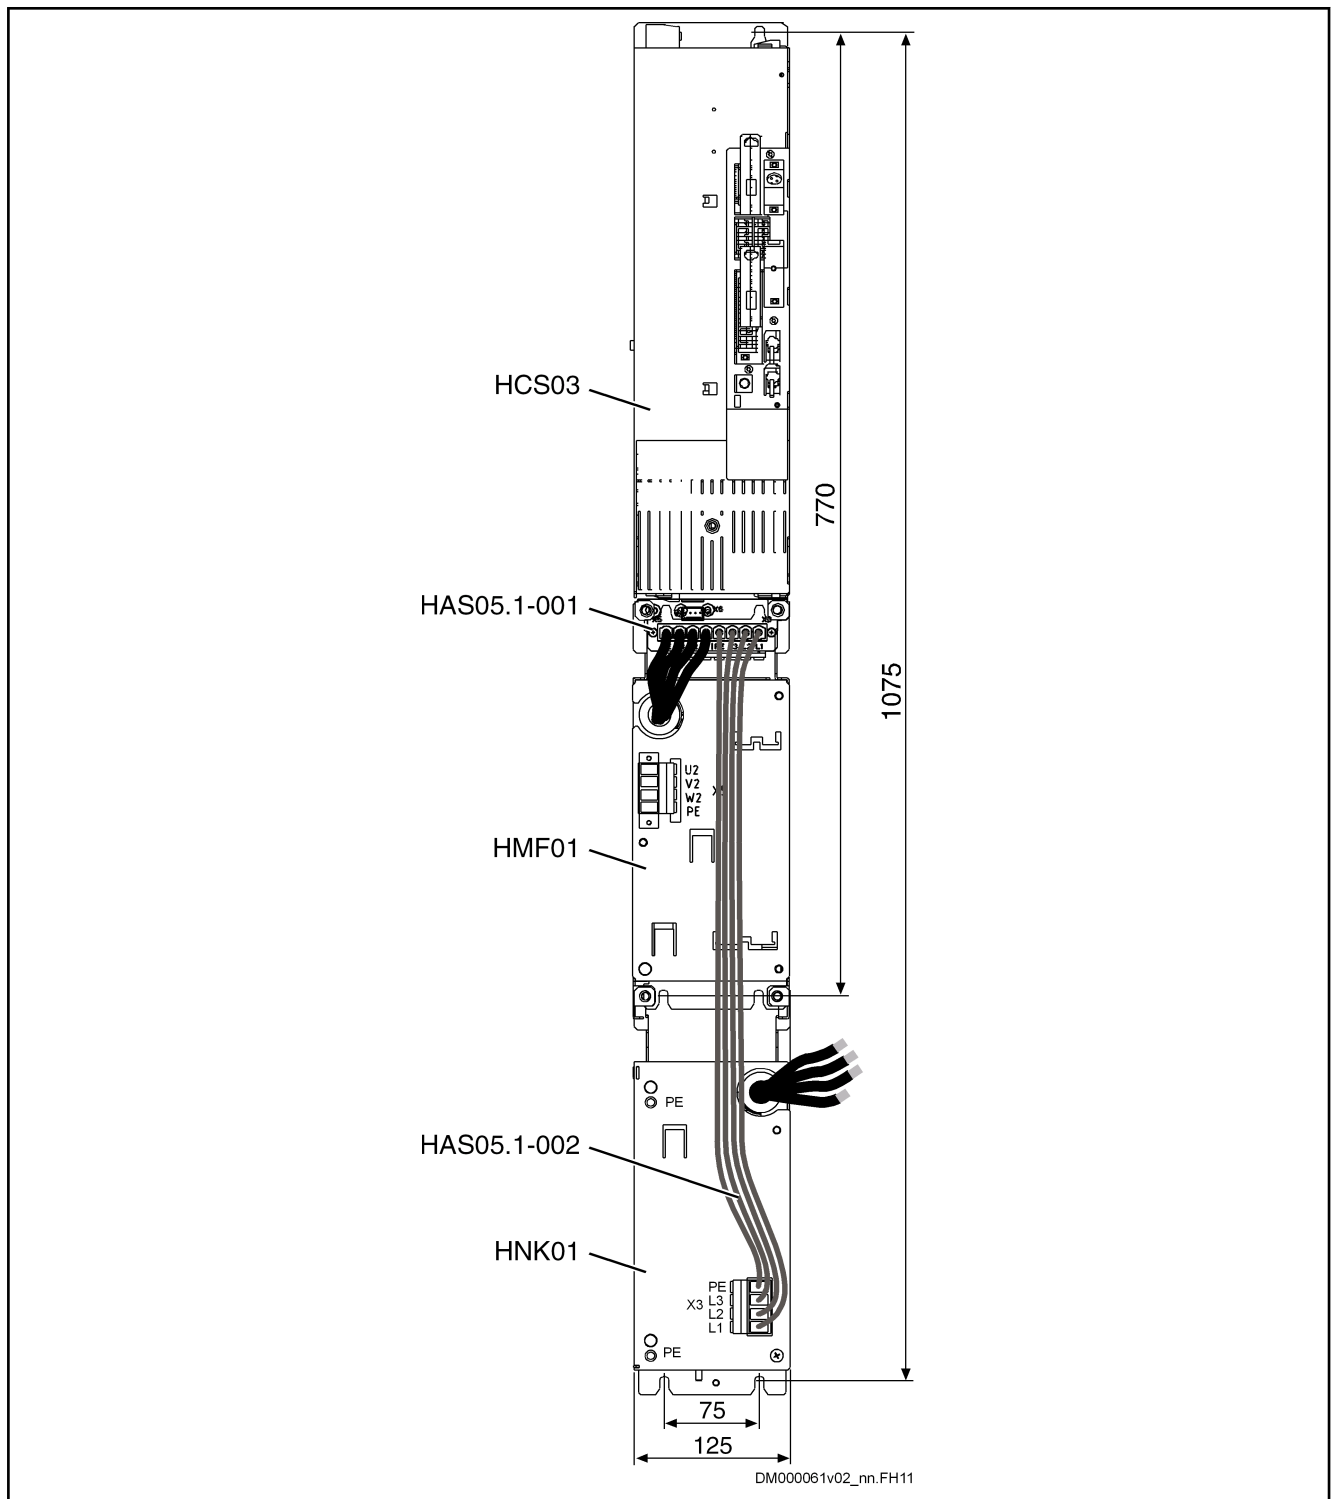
Arranging HCS03.1E-W0070 / HMF motor filter and HNK01 mains filter + HAS05.1-001 + HAS05.1-002
